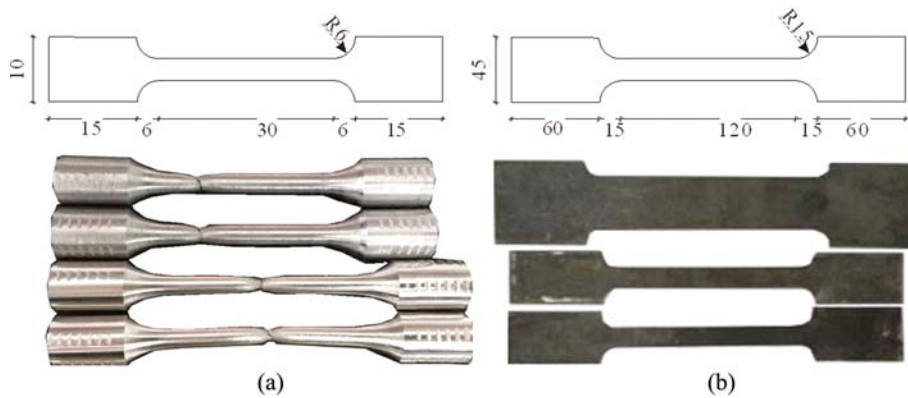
Tensile Test of Specimens. (a) Bolt Samples, (b) Steel Samples
